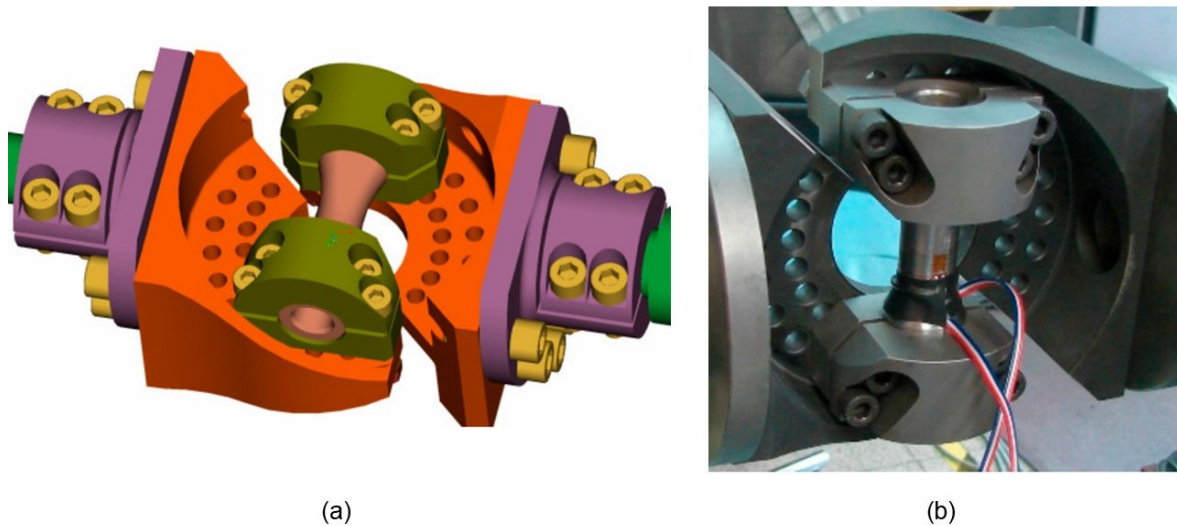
Pictures from [10] about the special fixture adopted to perform plane bending tests using the Schenck PWXN torsion machine: (a) CAD render of the fixture, (b) specimen mounted on it.
